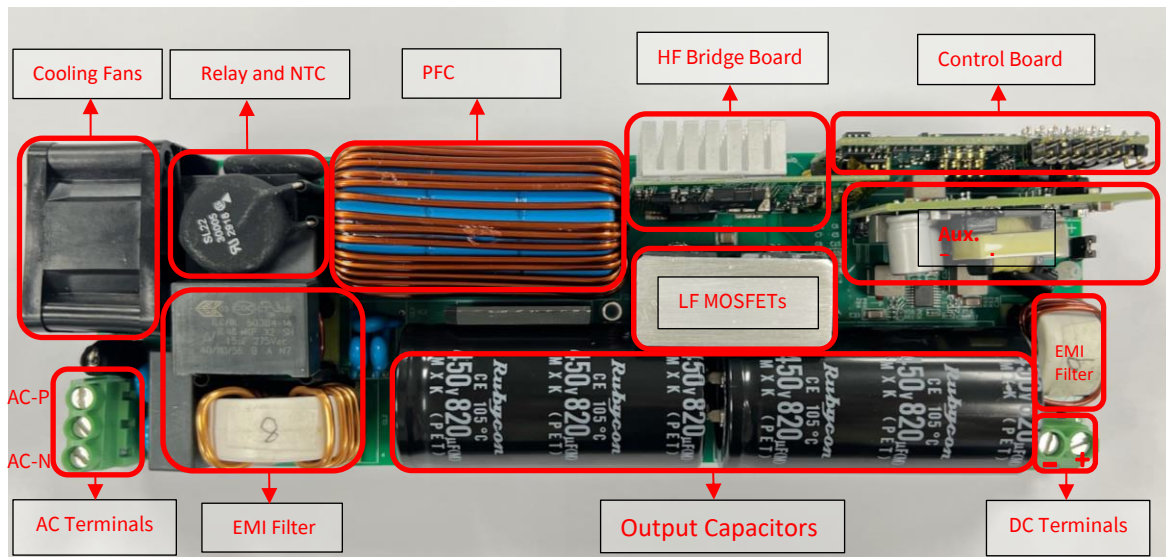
Top View of PCBA (220mm*73mm*40mm)
